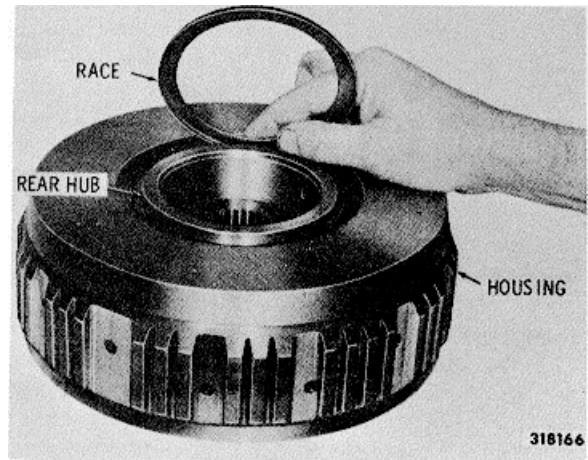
Removing (or installing) fourth clutch rear bearing race
